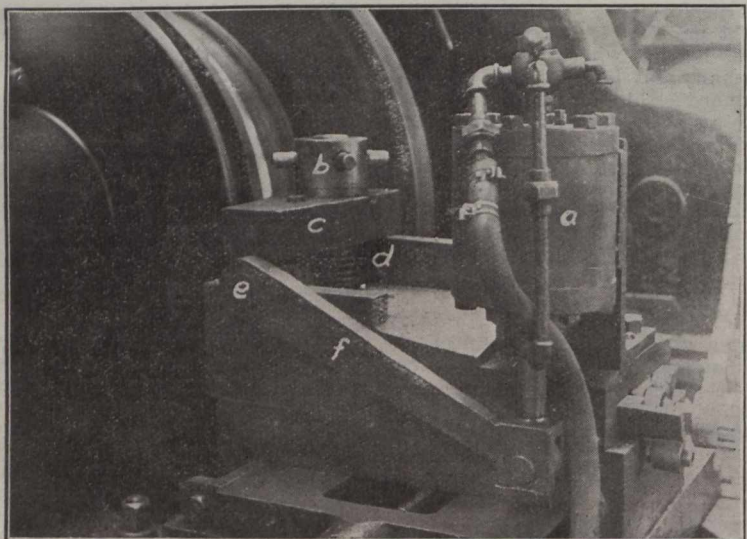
Air Clamp for Tools in Passenger Car Wheel Lathe.
